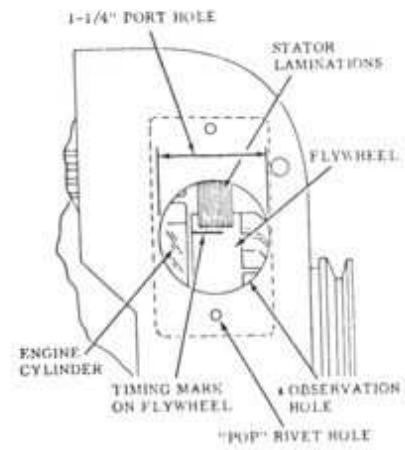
On Models HH80, HH100 and HH120, remove identification plate to observe timing mark on flywheel through port hole in blower housing.
